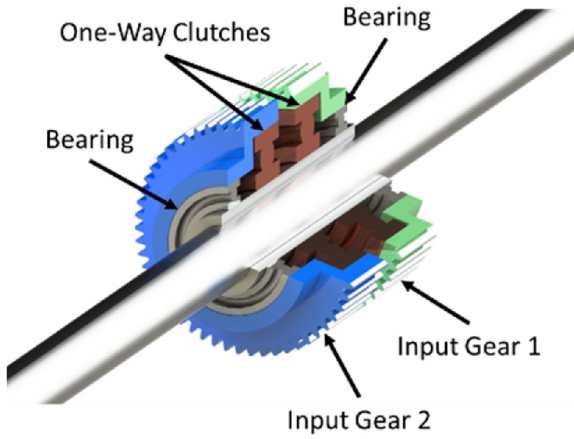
Cutaway view of input gears, showing positions of clutches and bearings.
